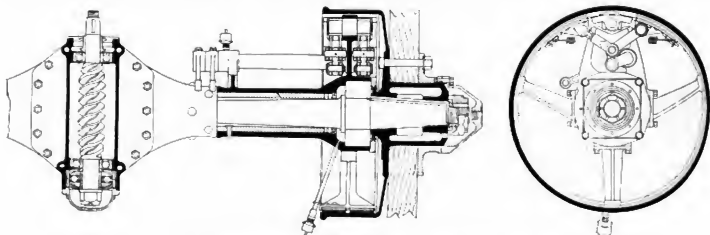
Sectional views of the new Sheldon 5-ton worm-driven axle for motor trucks
